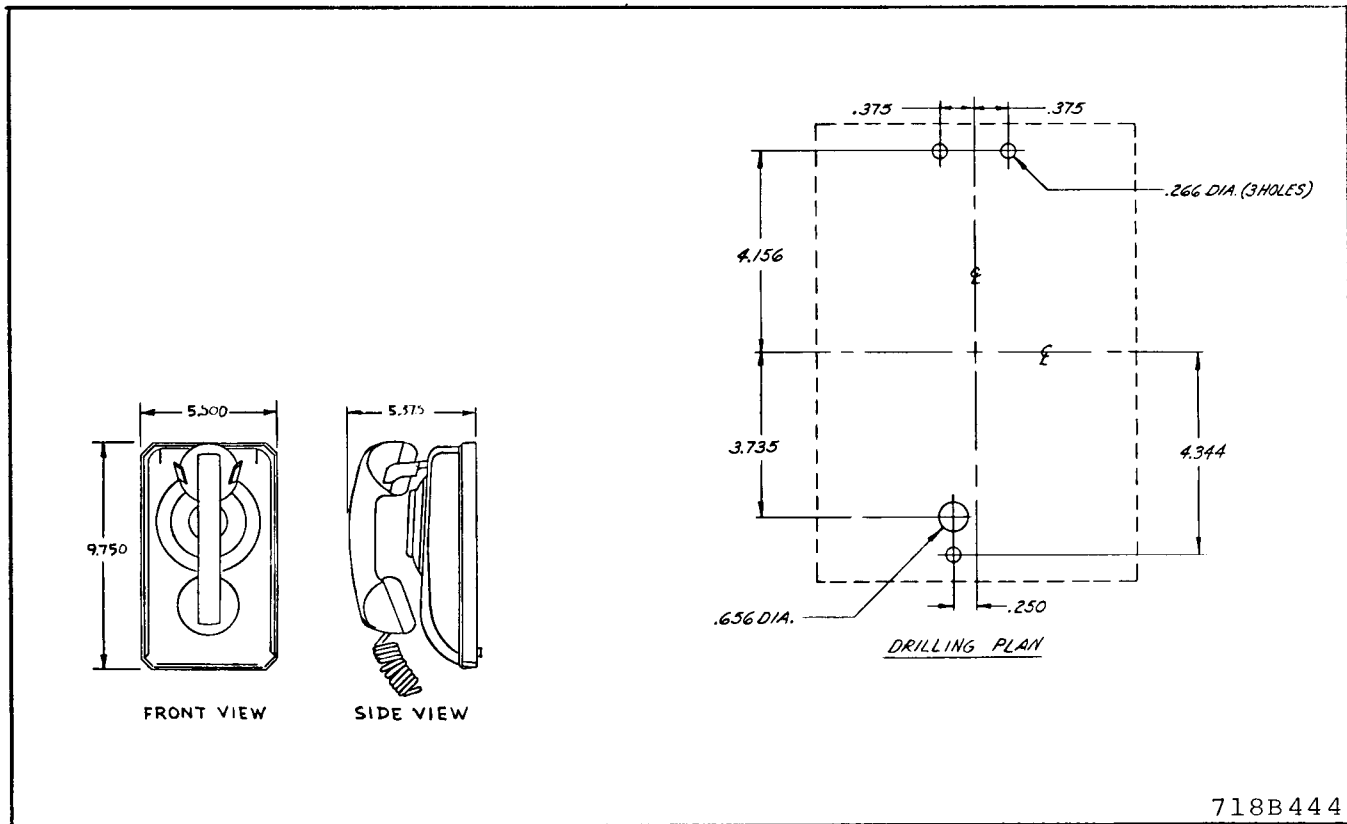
Mounting Dimensions for wall mounted Hookswitch- Handset Assembly
